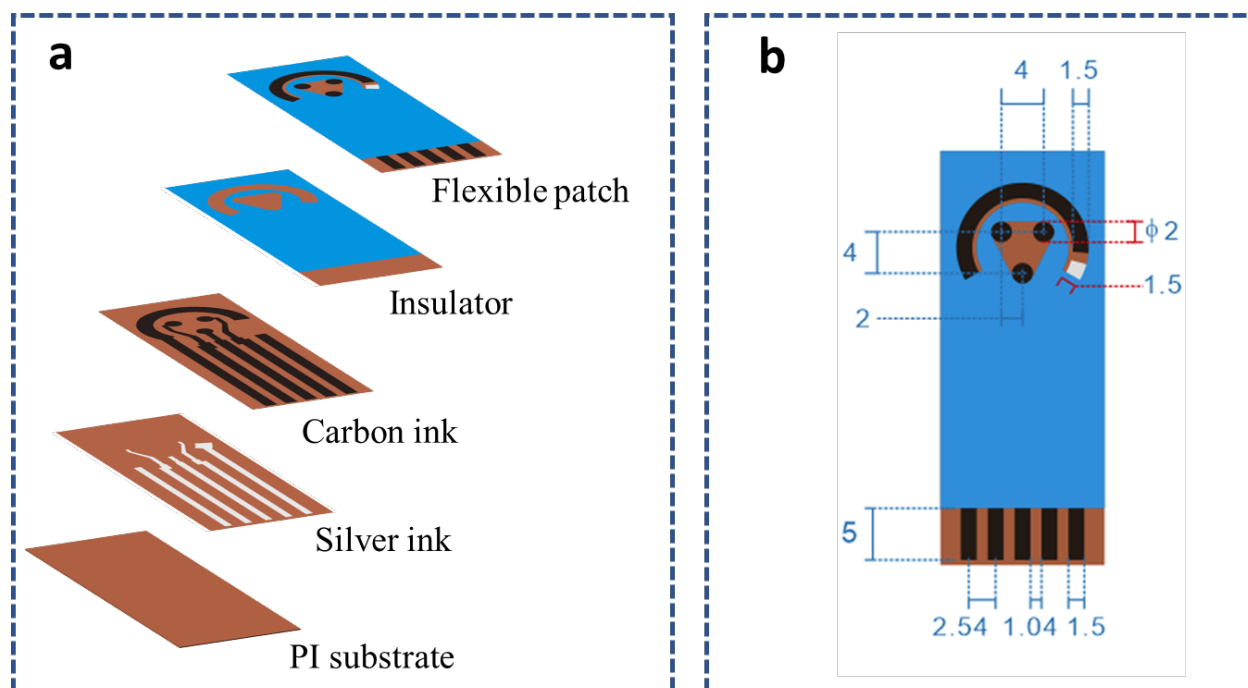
Flexible electrode Patch: a) Fabrication steps, b) Dimensions of the final product.
